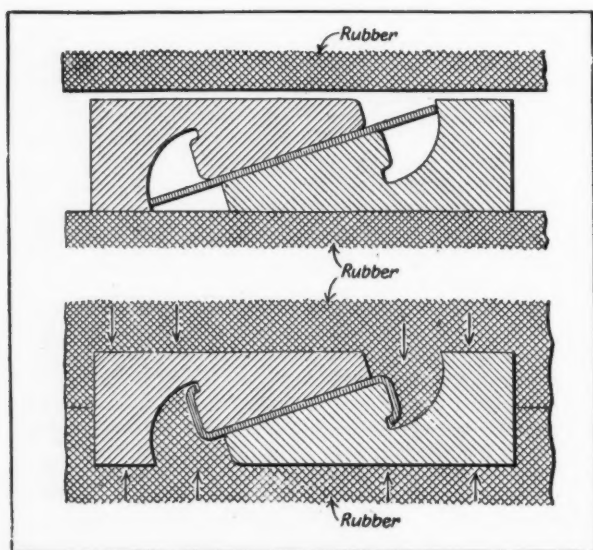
(Left) Set-up of Rubber Press for Double Flanging in Opposite Directions
